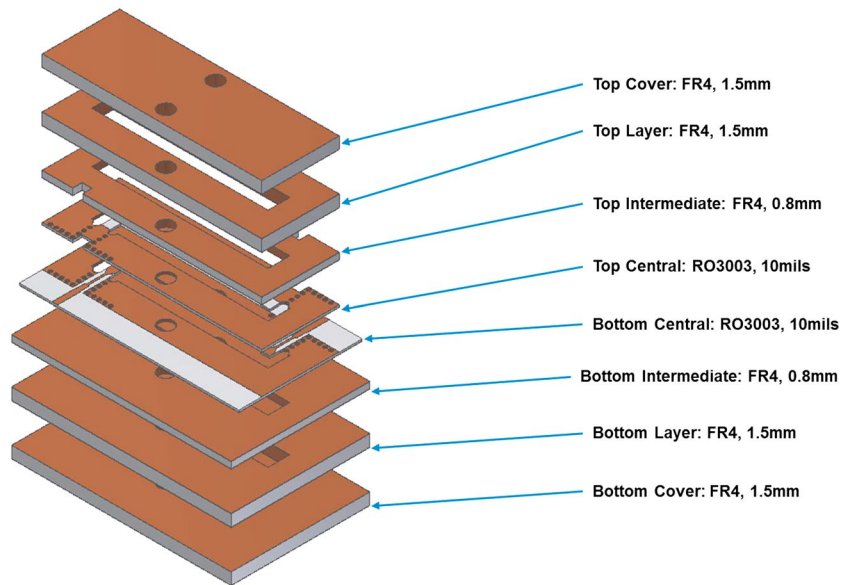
Layout of the PCB used for the manufacturing of the back-to-back transition.
